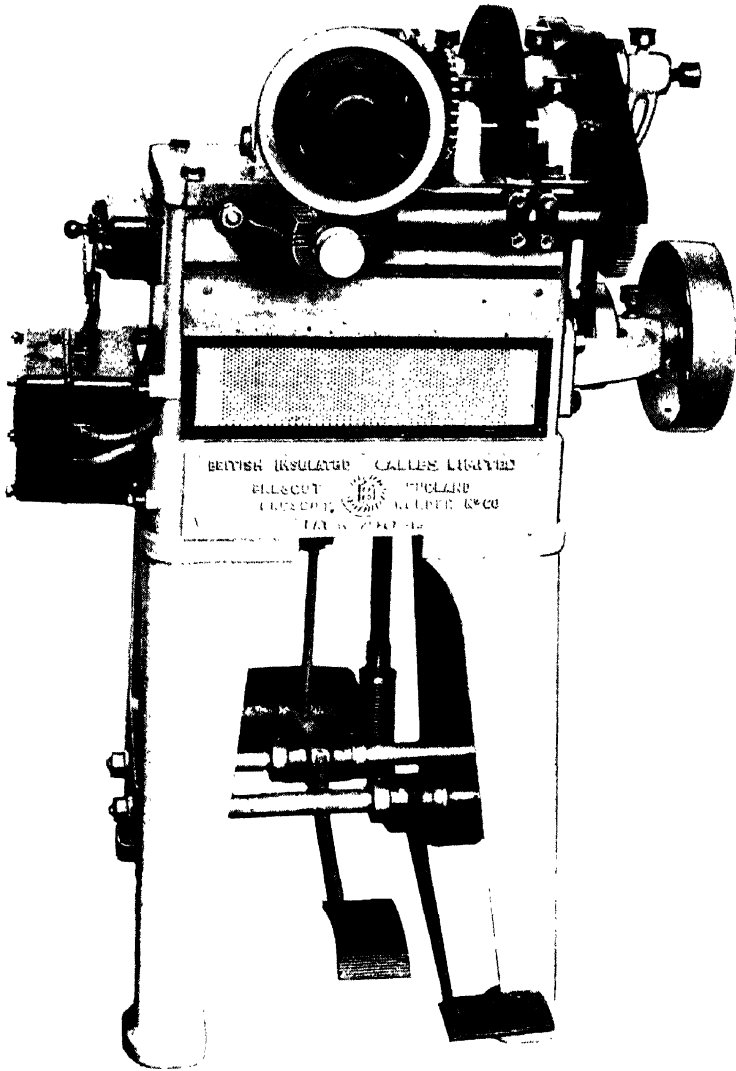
Electric Seam Welding Machine (British Helsby Cables Ltd.)
